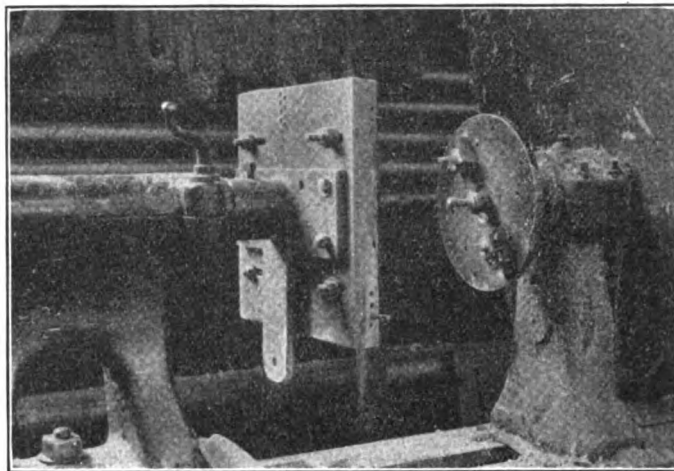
Arrangement of adjustable cutting tools on the face plate of a lathe
